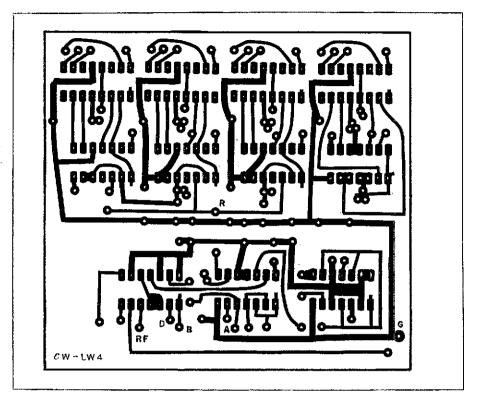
Etching pattern for the counter board, actual size. The pattern is shown from the foil side, with black representing copper.
